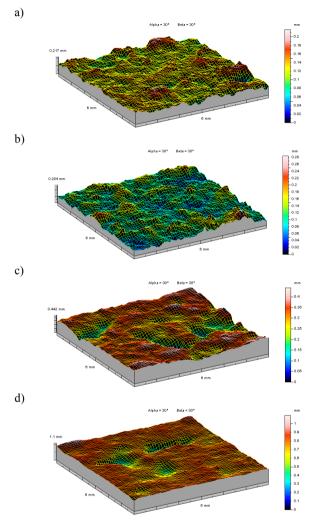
Three dimensional pictures (3D) of the surface of the castings, cast in moulds made of: a) MT1-1, b) MT1-2, c) MT1-3, d) MT1-4
